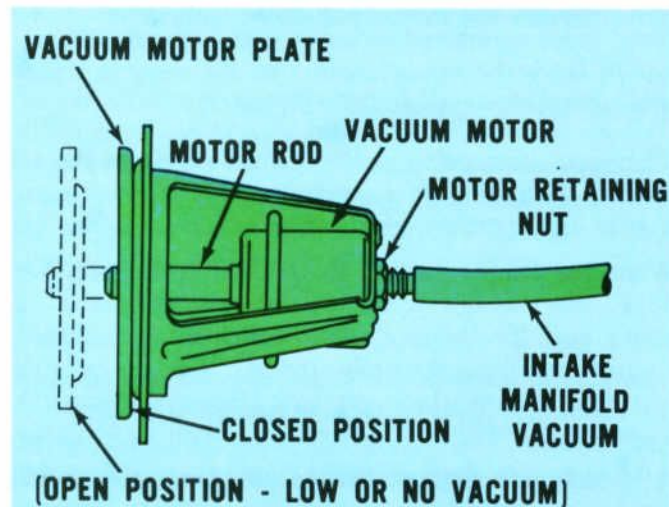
AIR VALVE AND VACUUM MOTOR ASSEMBLY
